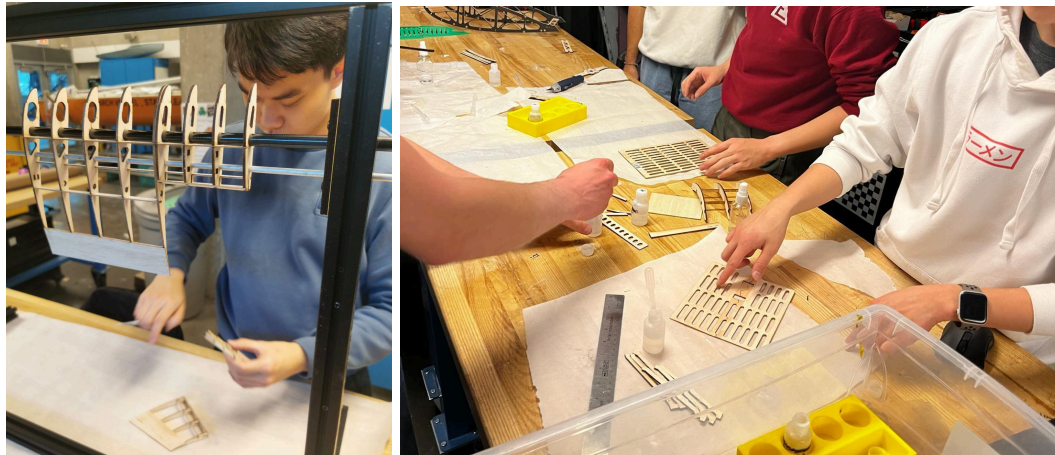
(left) Manufacturing Wing using Jigs& (right) Manufacturing Fuselage with Laser Cut Balsa
